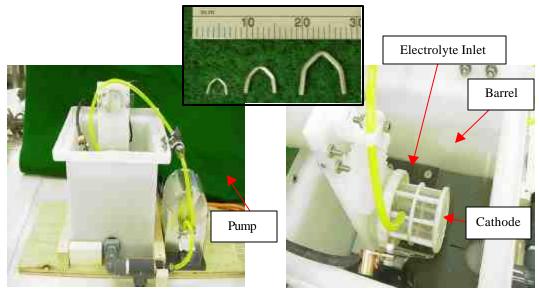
Titanium medical clip samples (insert, above), barrel deburring fixture (left), view of inside of tank (right)
